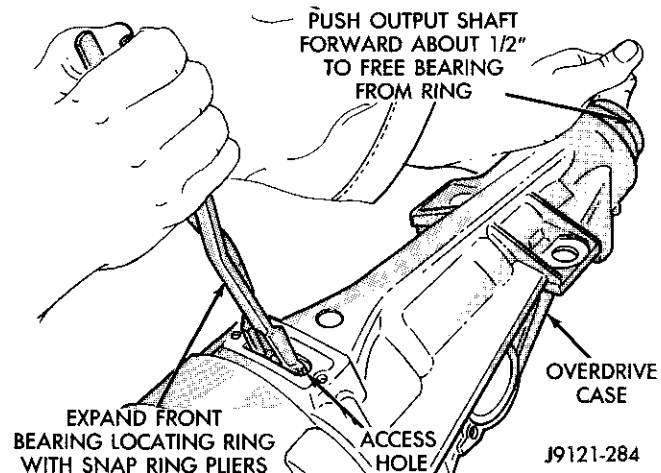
Releasing Shaft Front Bearing From Locating Ring
